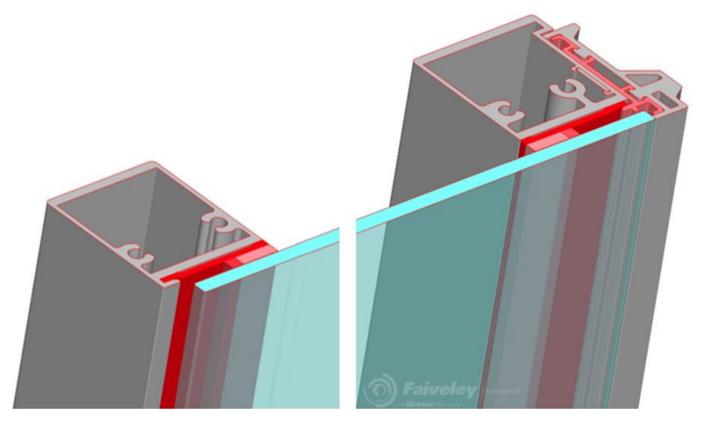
Faiveley's Glass Mounted in Subframe Arrangement on PED Door
